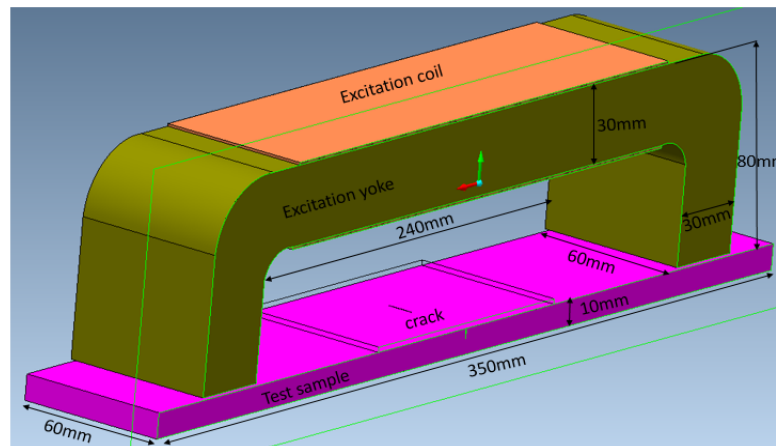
The 3D FEM schematic layout of the PMFL inspection probe set-up with dimensions, alongside a defective test plate.
